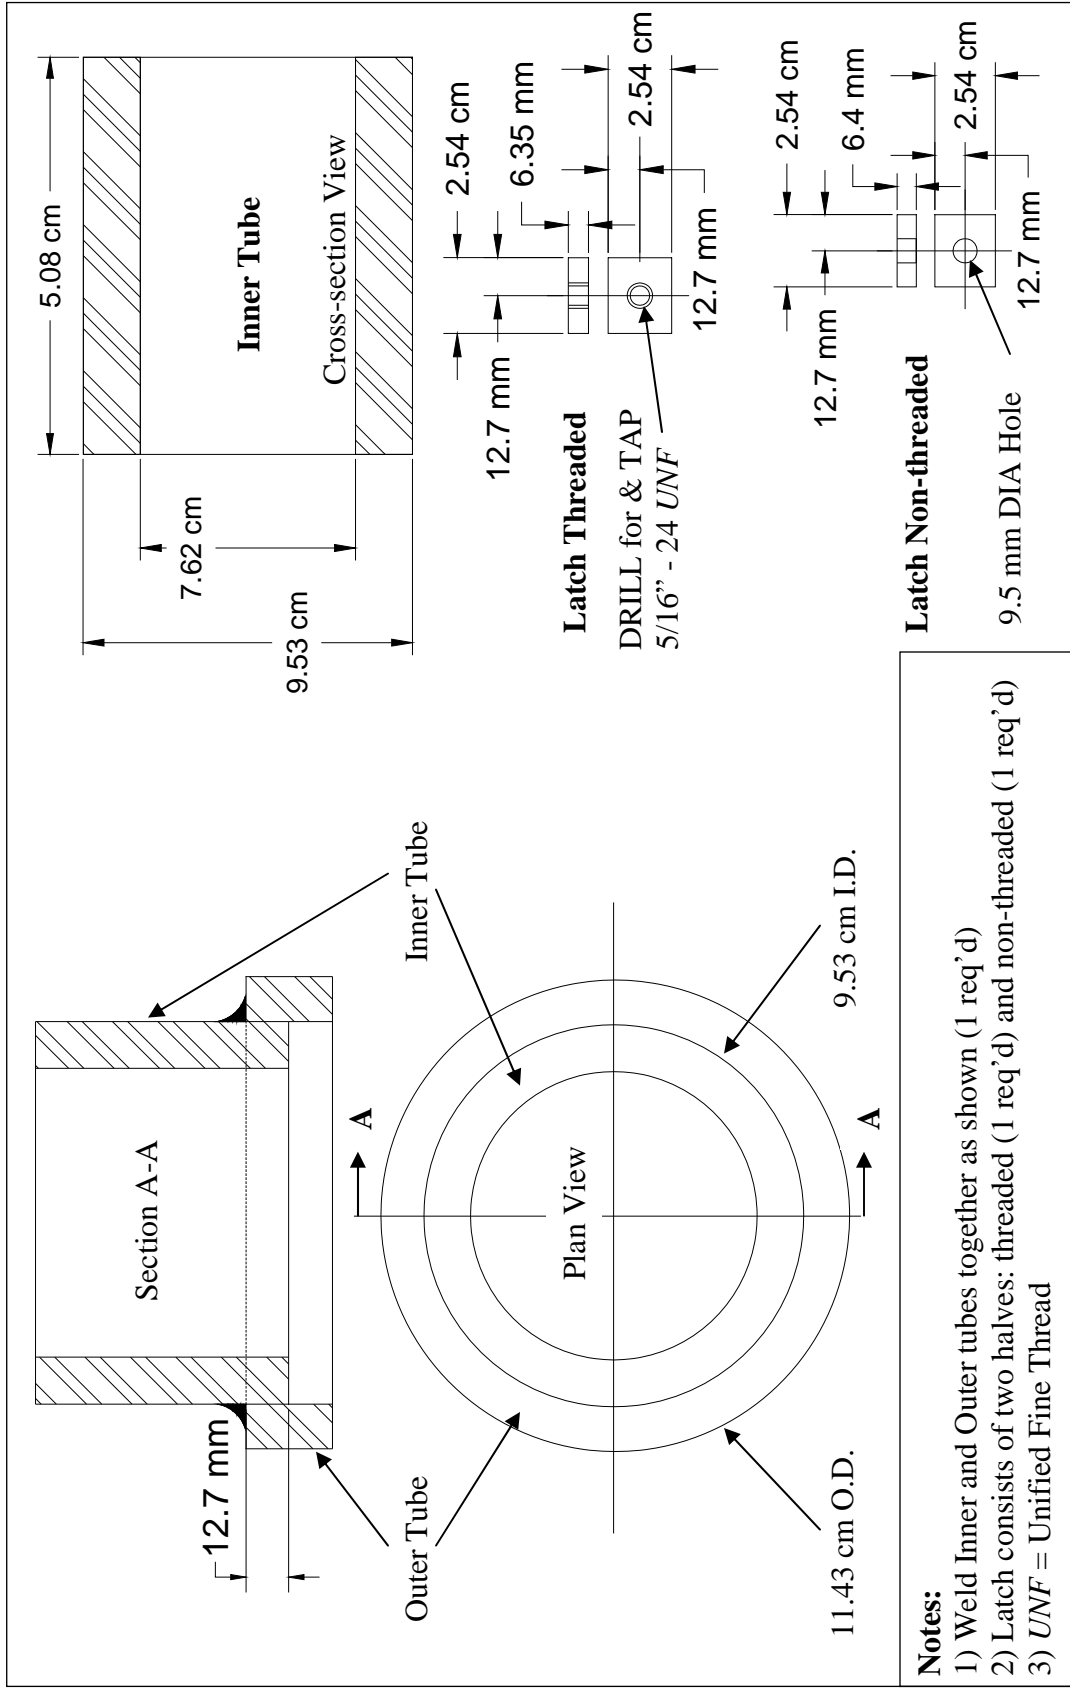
PM Mold Assembly: Guide Collar and Latch
